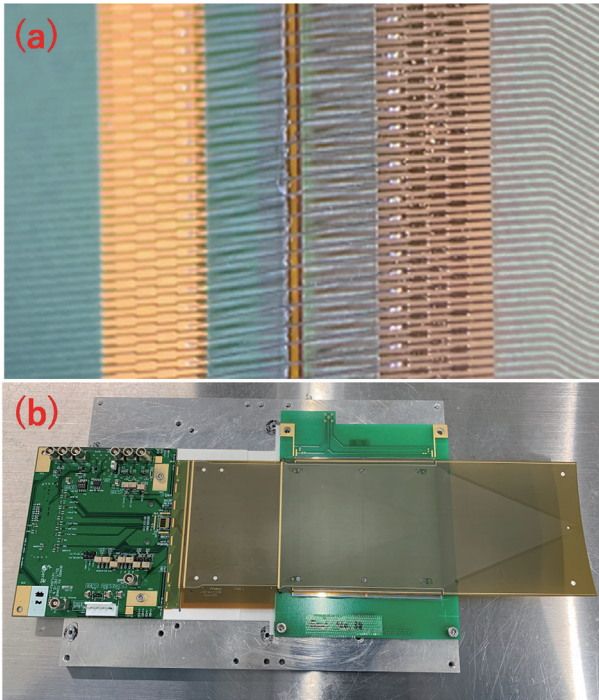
Appearance of wire bonding connection (a) and the test module with the FPC boards (b)
